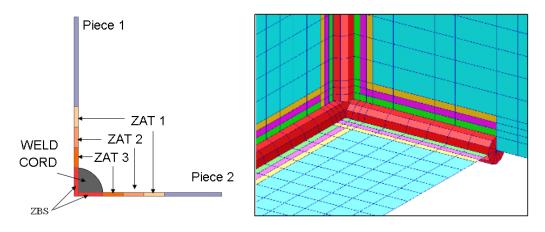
y 3: Weld with HAZ and UWZ
